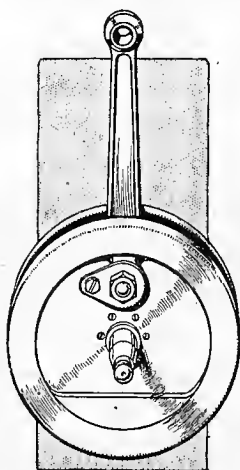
The built-up crank, inside flywheels, and connecting rod.
